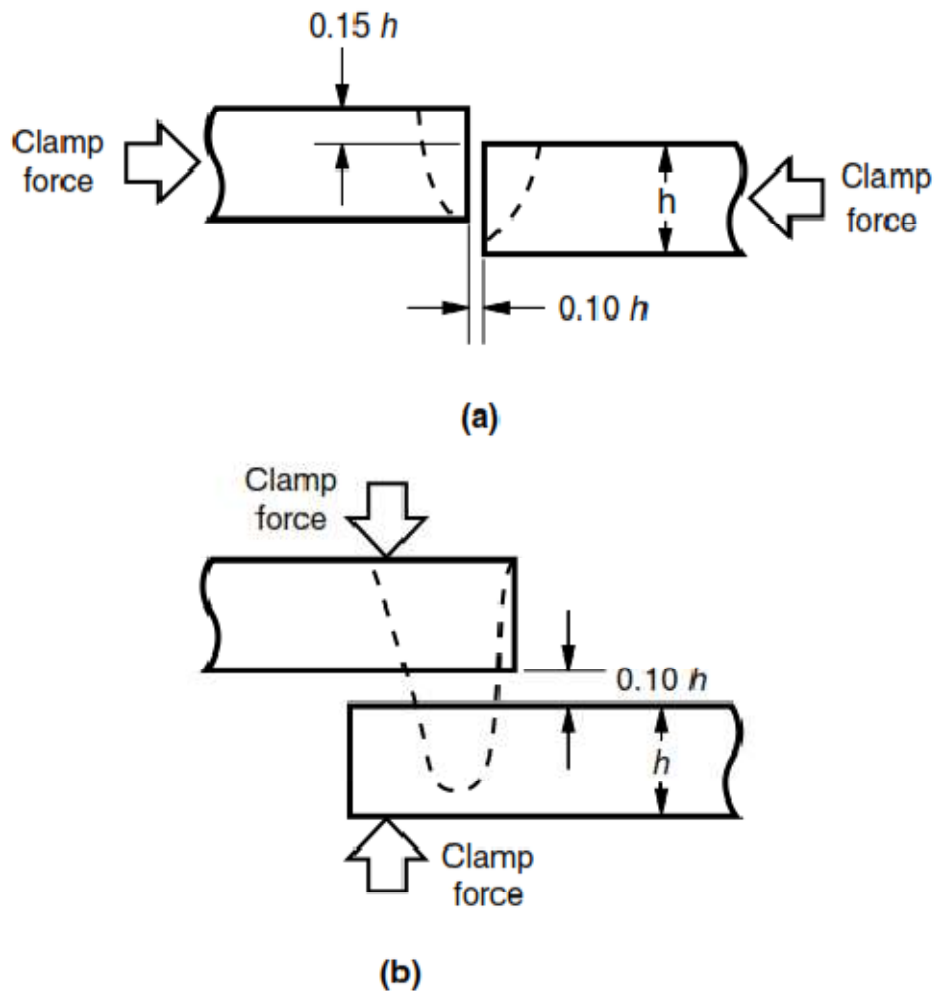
(a) Butt joint and (b) Lap joint specification in laser welding [6]
